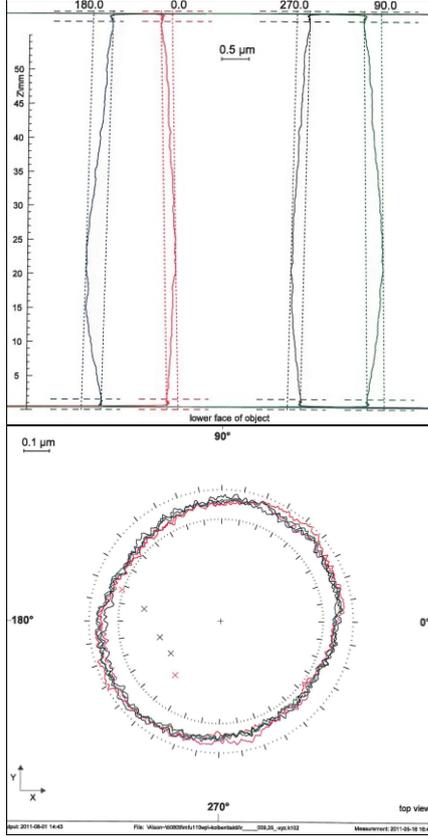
Dimensional characterisation of the $\phi 35$ -mm PC units.
